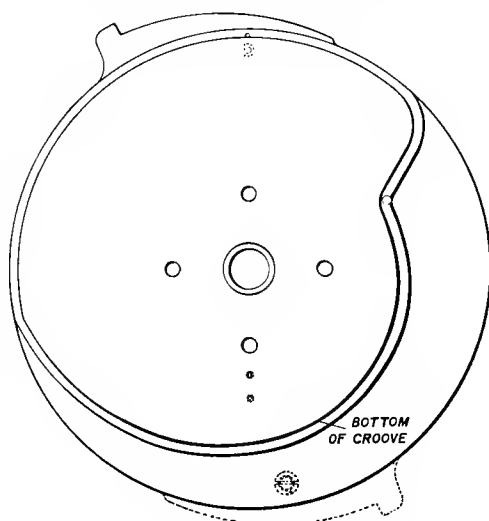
Outline of Cam Groove in Clerk Explosion Apparatus
